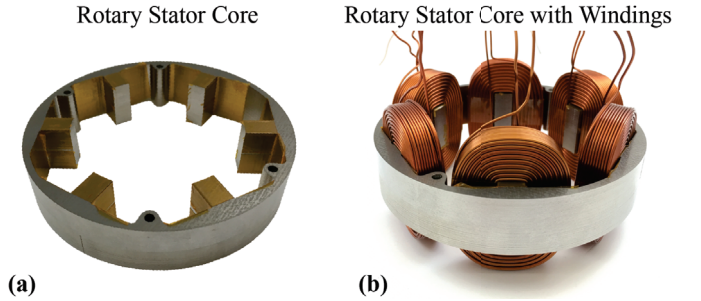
Hardware realization of the SBDS LiRA stator parts: (a) Outer stator rotary core with 0.35 mm thick laminated sheets and Kapton tape insulation. (b) Rotary stator windings realized with 0.8 mm wire diameter and 190 turns.
